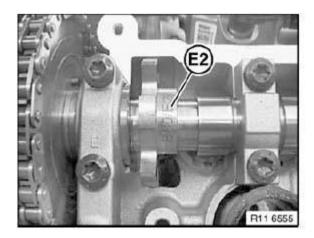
Identifying Letters/Numbers On Camshafts Point Upwards (E2) Courtesy of BMW OF NORTH AMERICA, INC.
